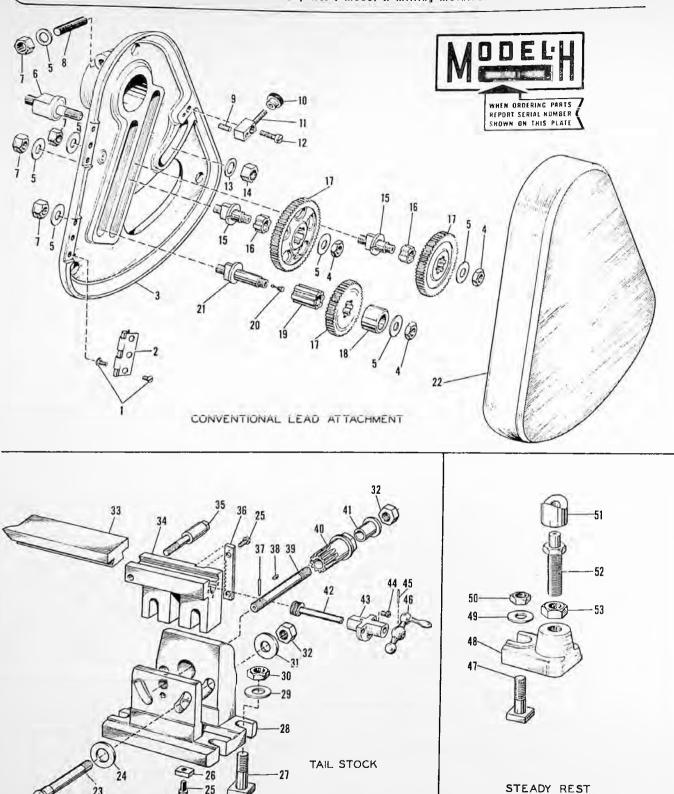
Conventional Lead Attachment, Tail Stock and Steady Rest
